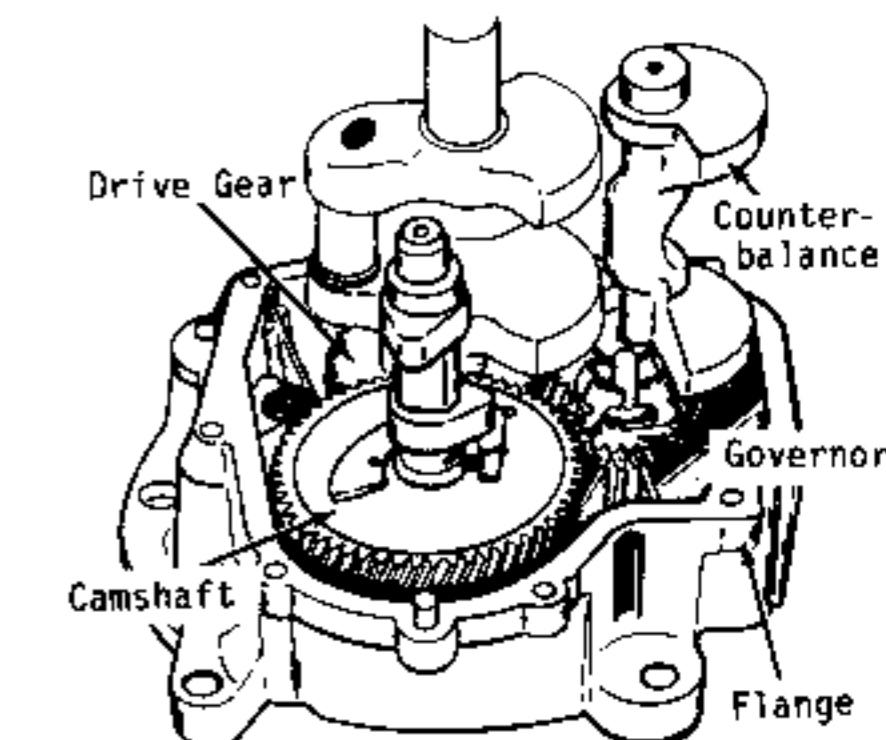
View of relative position of camshaft, crankshaft and counterbalance shaft in crankcase base plate (oil pan).
